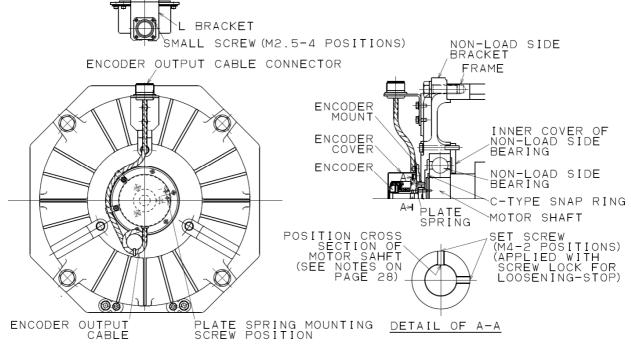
Detailed view of the anti-load side encoder and bearing surround
